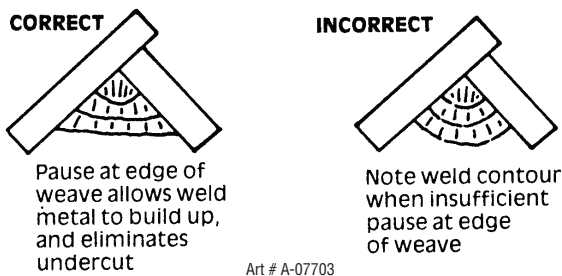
Examples of Vertical Fillet Welds
